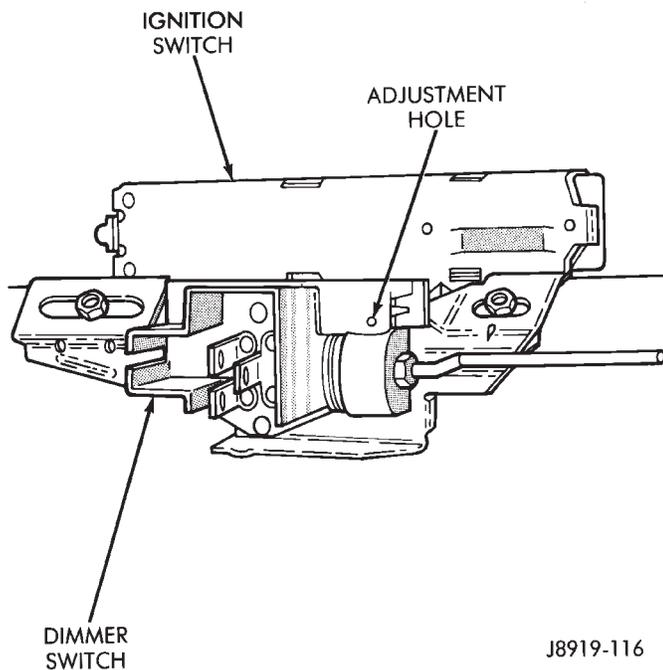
Ignition Switch/Headlamp Dimmer Switch—Typical
